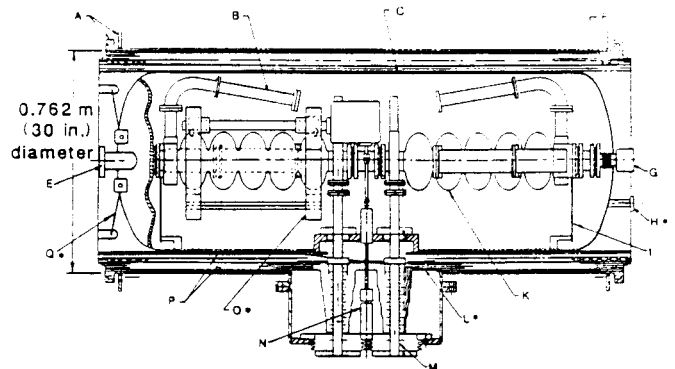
Top view of a CEBAF cryo-unit. Asterisked items shown only once. (A. Vacuum shell flange and captured seal ring; B. HOM load; C. Magnetic shield; E.* 2 K return helium connection and helium vessel; F. 40 to 50 K radiation shield; G.* Beam-pipe flange surface on end valve; H.* 2.2 K helium supply line; I. Outboard cavity support; K. Cavity; L.* Axial support; M. Fundamental waveguide; N. Rotary feedthrough; Q.* Tuning mechanism; P. Superinsulation; Q.* Helium vessel support rod.)
